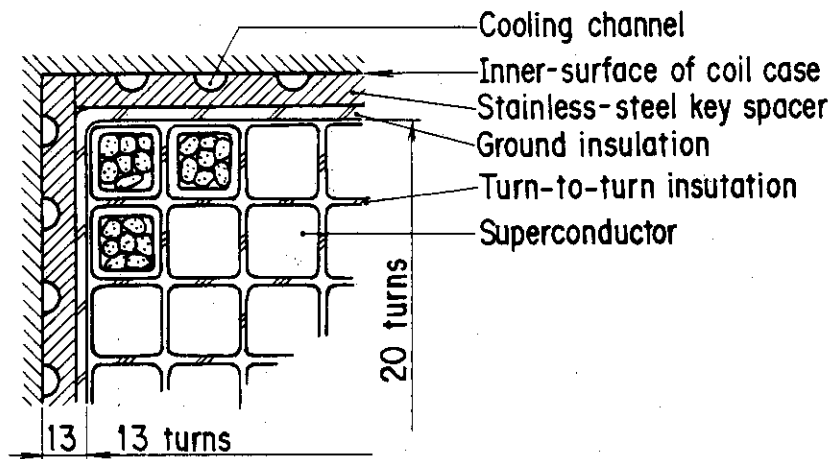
Cross section of TF coil winding - pack for the '86 FER (ACS)
